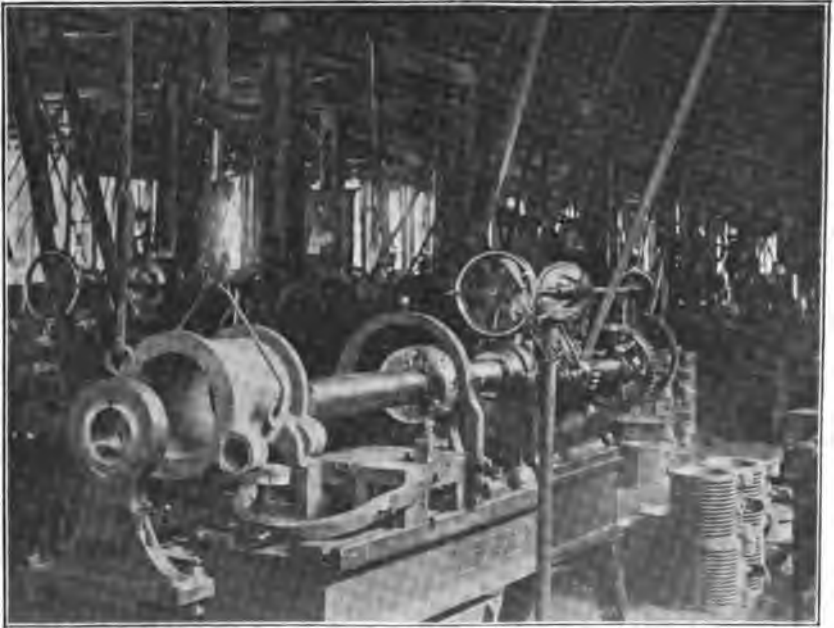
PLACING CYLINDER CASTINGS IN BORING MACHINE WITH AIR HOIST.
